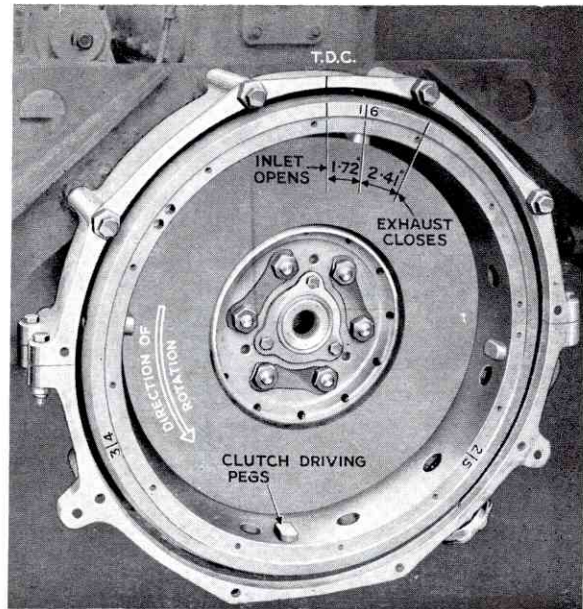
VALVE TIMING MARKS ON FLYWHEEL
